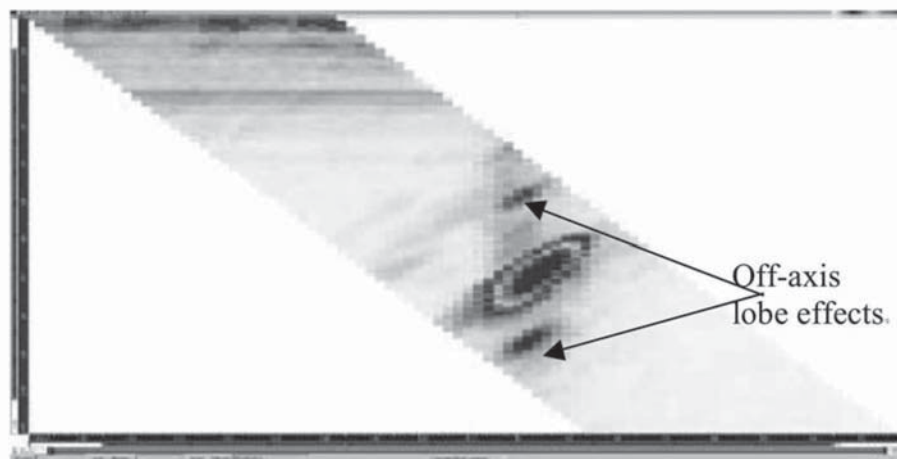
SCANNING END-DRILLED HOLES TO OBTAIN BEAM DIMENSIONS IN PASSIVE PLANE
